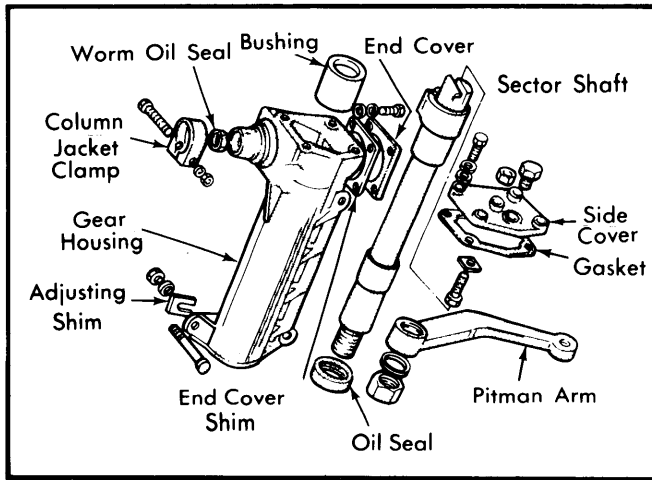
Exploded View of Recirculating Ball & Nut Steering Gear
